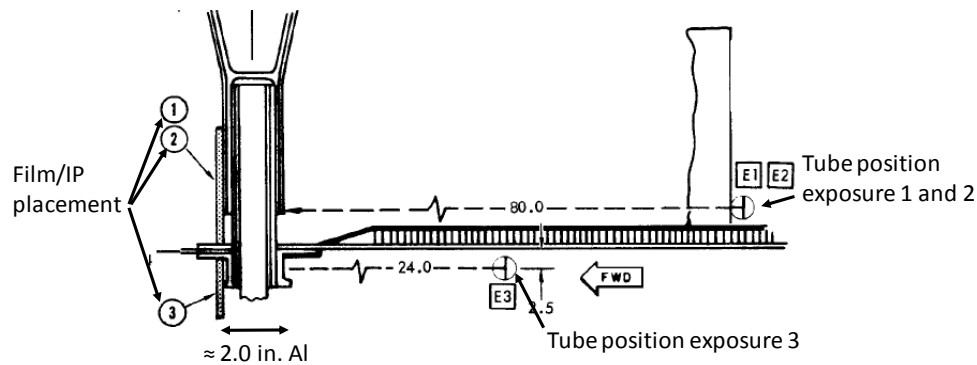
C-5 Upper Lobe Truss Splice Inspection Schematic
